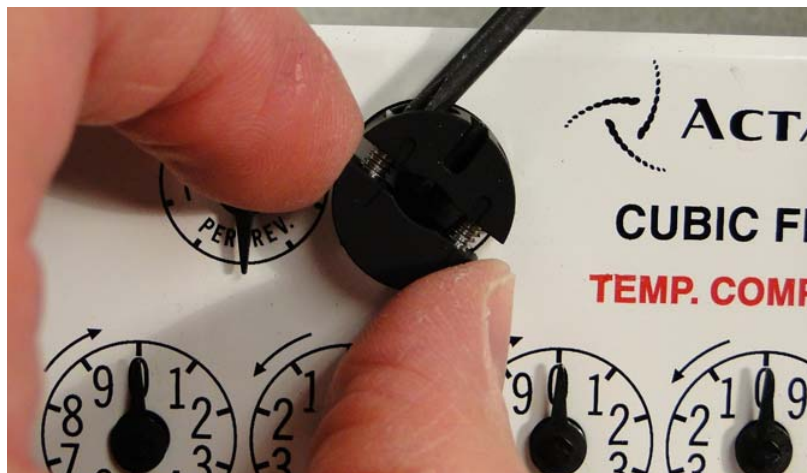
4. Thread Screws Into threaded Wheel Half
